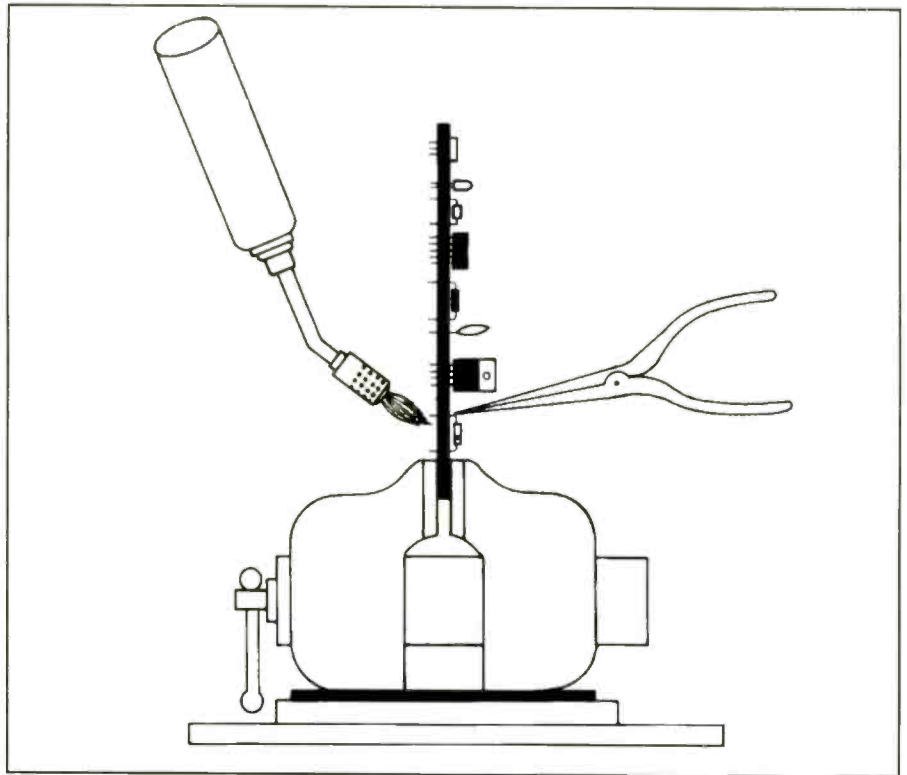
One way to speed up the removal of the components is to heat the solder side of the board with a high wattage soldering gun, or a desoldering torch.
